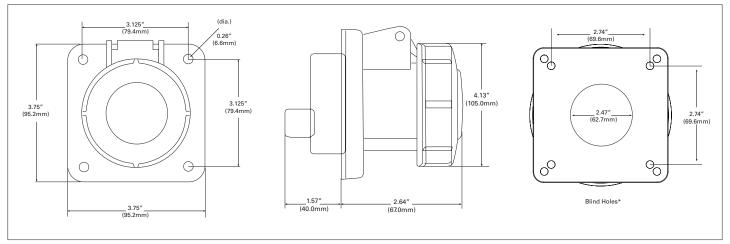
30A & 32A 4-P, 5-W Receptacles, Front, Side & Back Views
